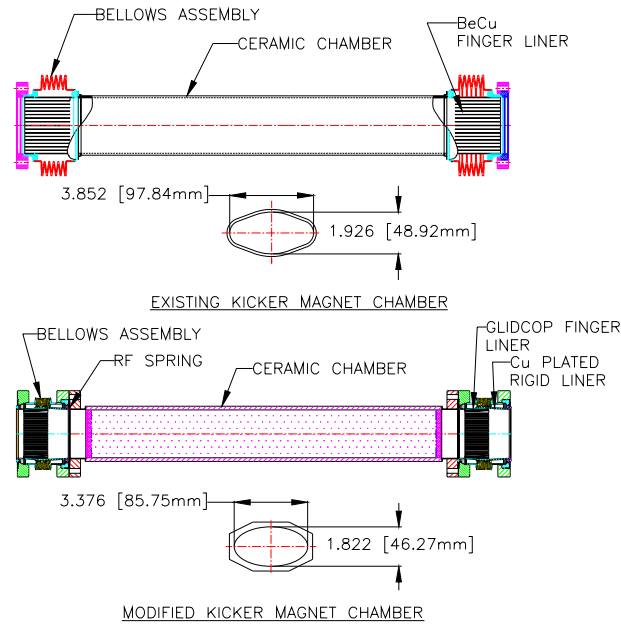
Existing and modified kicker magnet vacuum chamber assemblies.
